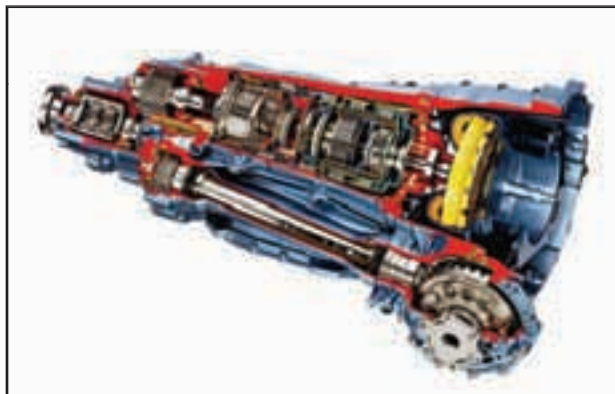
Six-speed automatic transmission for all-wheel drive with side shaft driven by a beveloid gear set.
